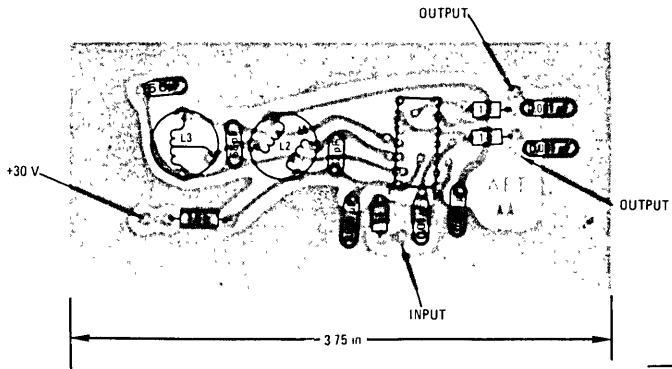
PRINTED CIRCUIT BOARD AND PARTS ARRANGEMENT
